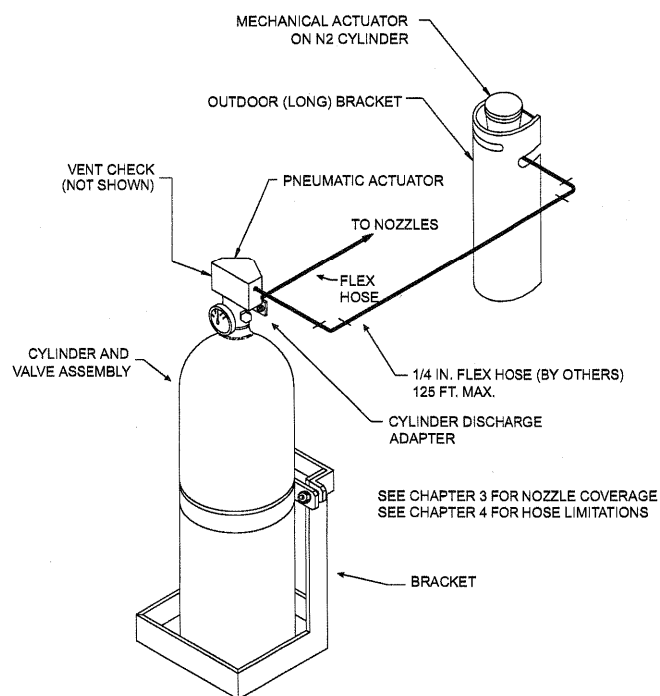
Off-Road Fire Protection System Cylinder and Valve Assembly and Remote Manual, Mechanical Actuator.
